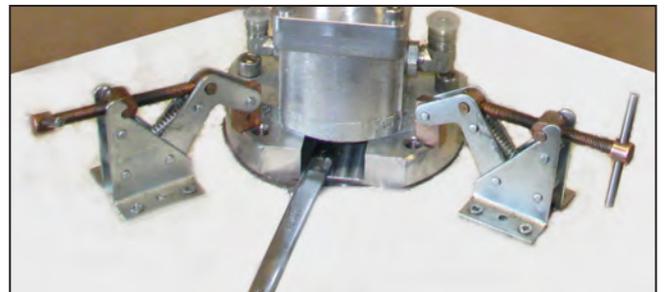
3/4" (19 mm) open end wrench holding thru-shaft and preventing it from turning while removing swivel tit assembly/gland nut.
